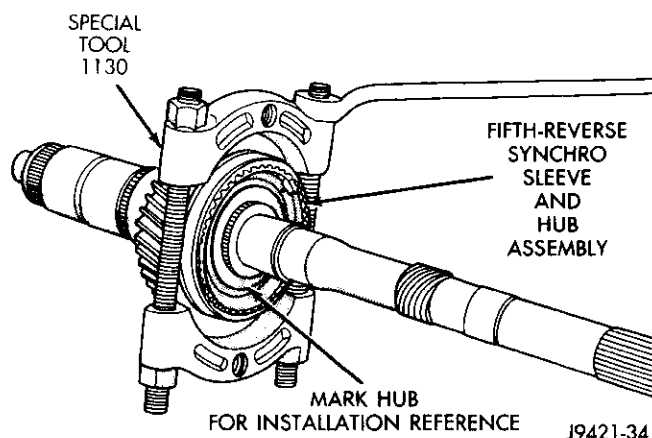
Fifth-Reverse Synchro Hub And Sleeve Removal
